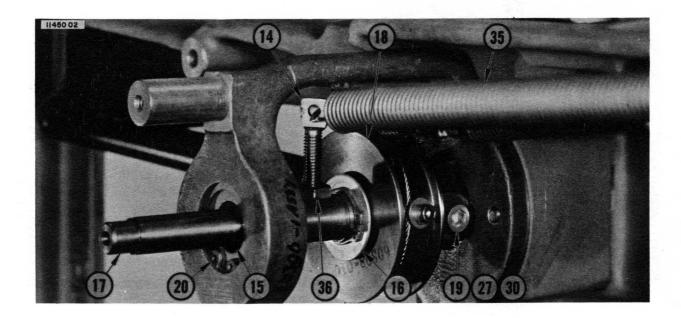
Removing Tension Arm Mounting Assembly and Tape Guides
